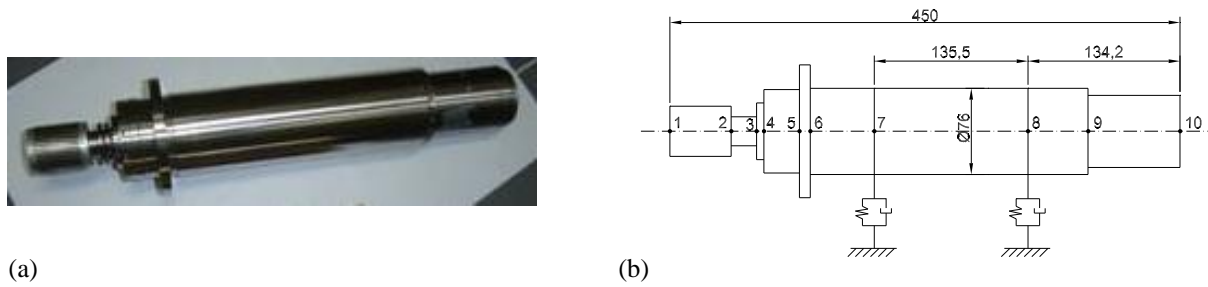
Grinding machine rotor spindle and equivalent model by flexible shaft elements.
